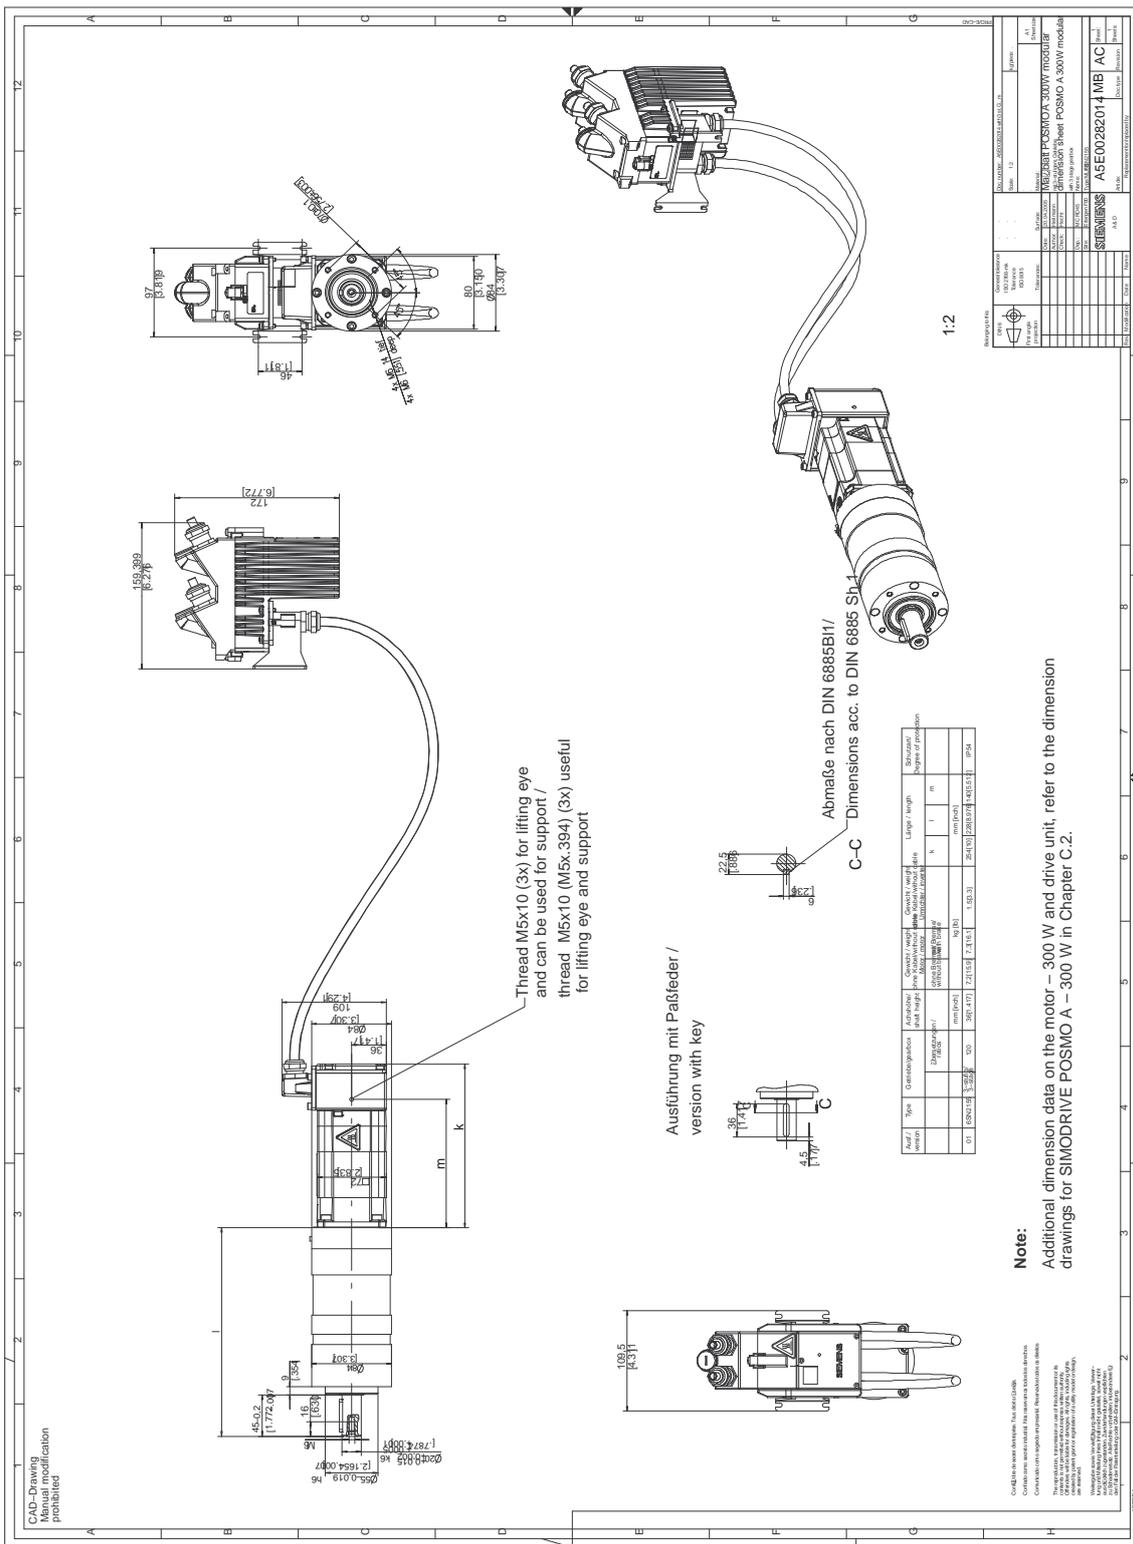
Dimension drawing: SIMODRIVE POSMO A – 300 W extension set "separate version" with planetary gearbox (3-stage)
